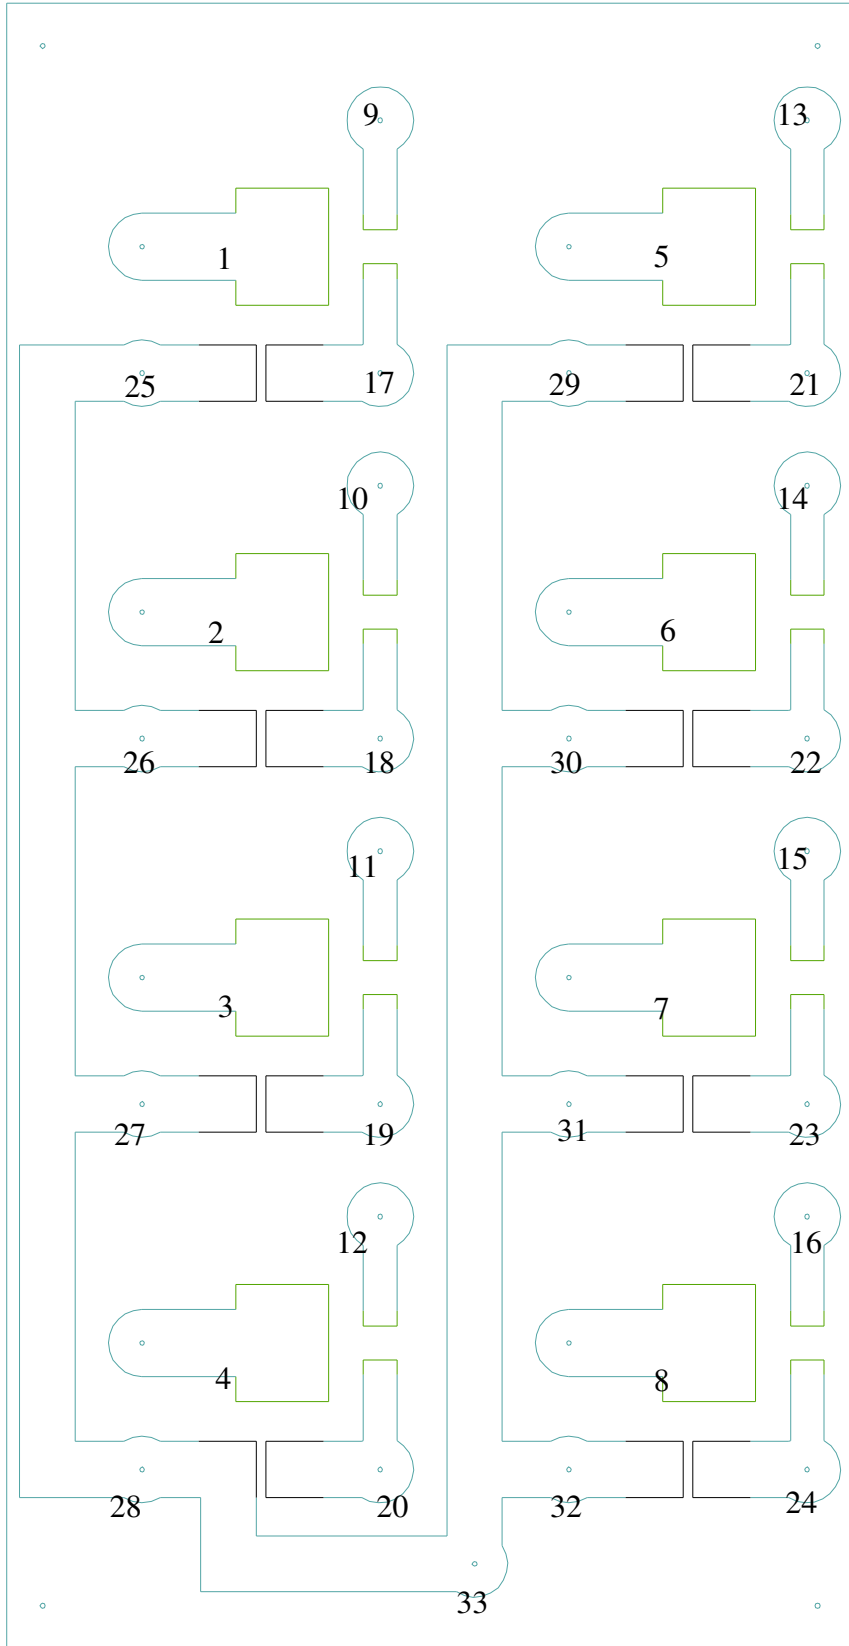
PCB Circuit Board Pad Numbers
